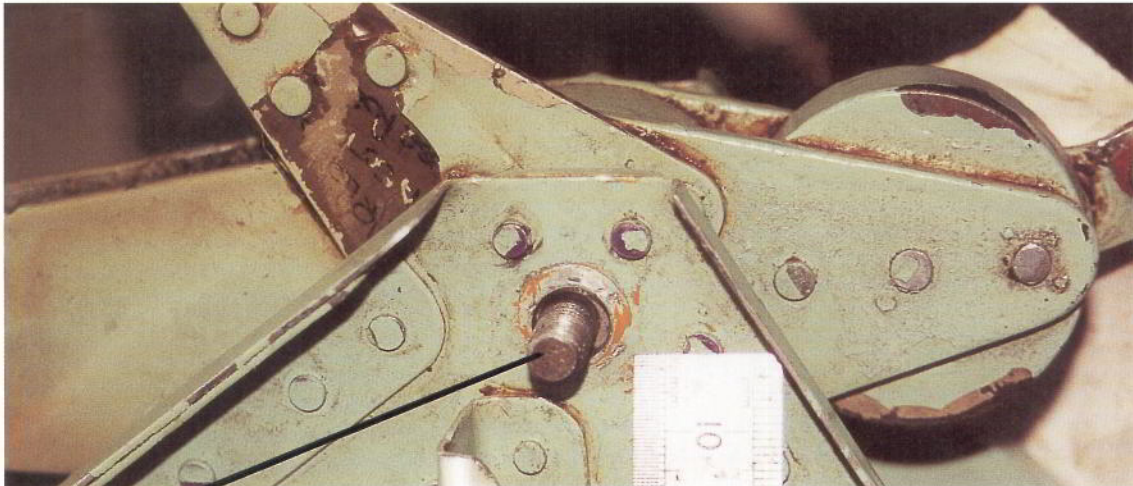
ELEVATOR GUST LOCK ASSEMBLY
